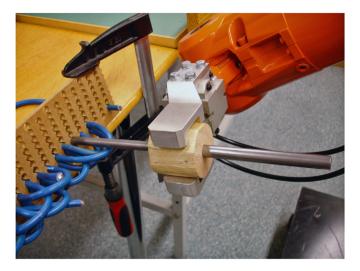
Cable feeder tool dummy and the stator dummy used with an ABB IRB1400 robot in positioning experiments.
